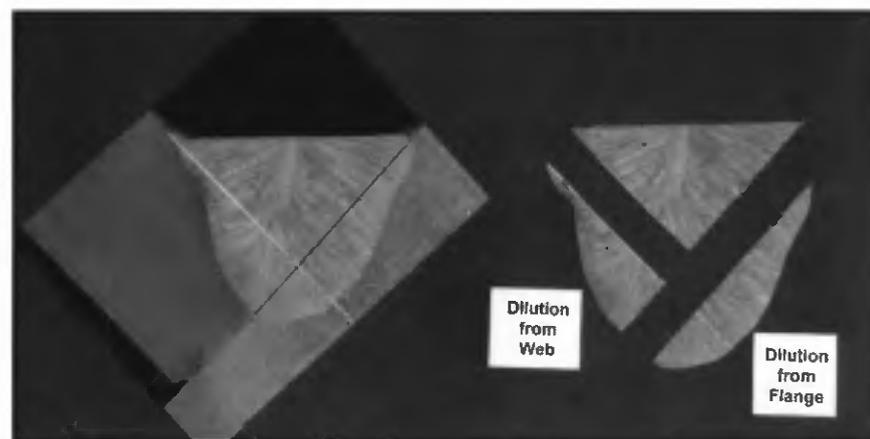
Photomacrograph of a cross section of fillet weld BWF120. Left — as taken; right — after being cut along scribe lines prior to the pieces being weighed for dilution calculation. Not all of the flange thickness is shown; the flange and web are both $\frac{1}{8}$ in. (9.5 mm) thick.
